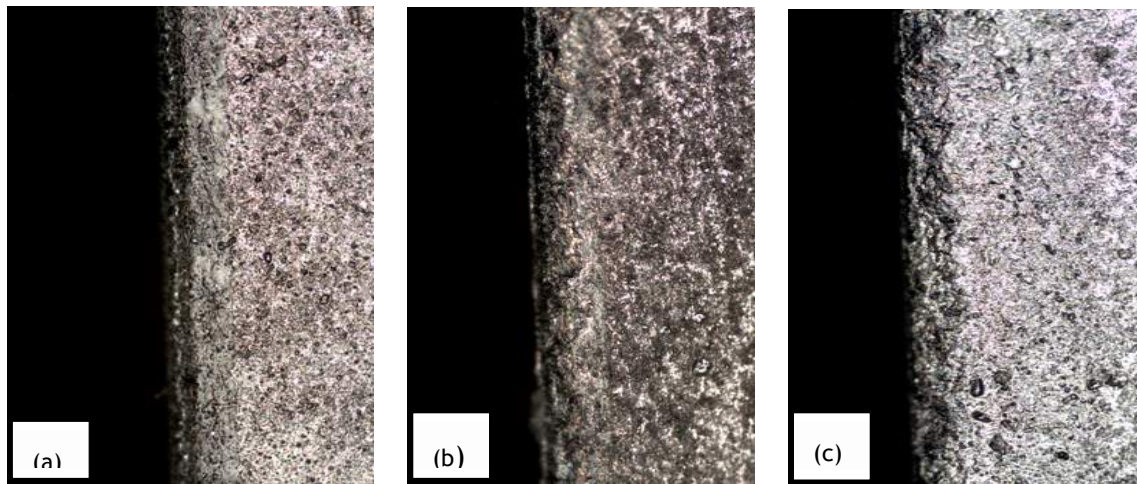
Wear of the single-layered insert after (a) run 1, (b) run 3 and (c) run 6 during milling operations while using high pressure cooling
